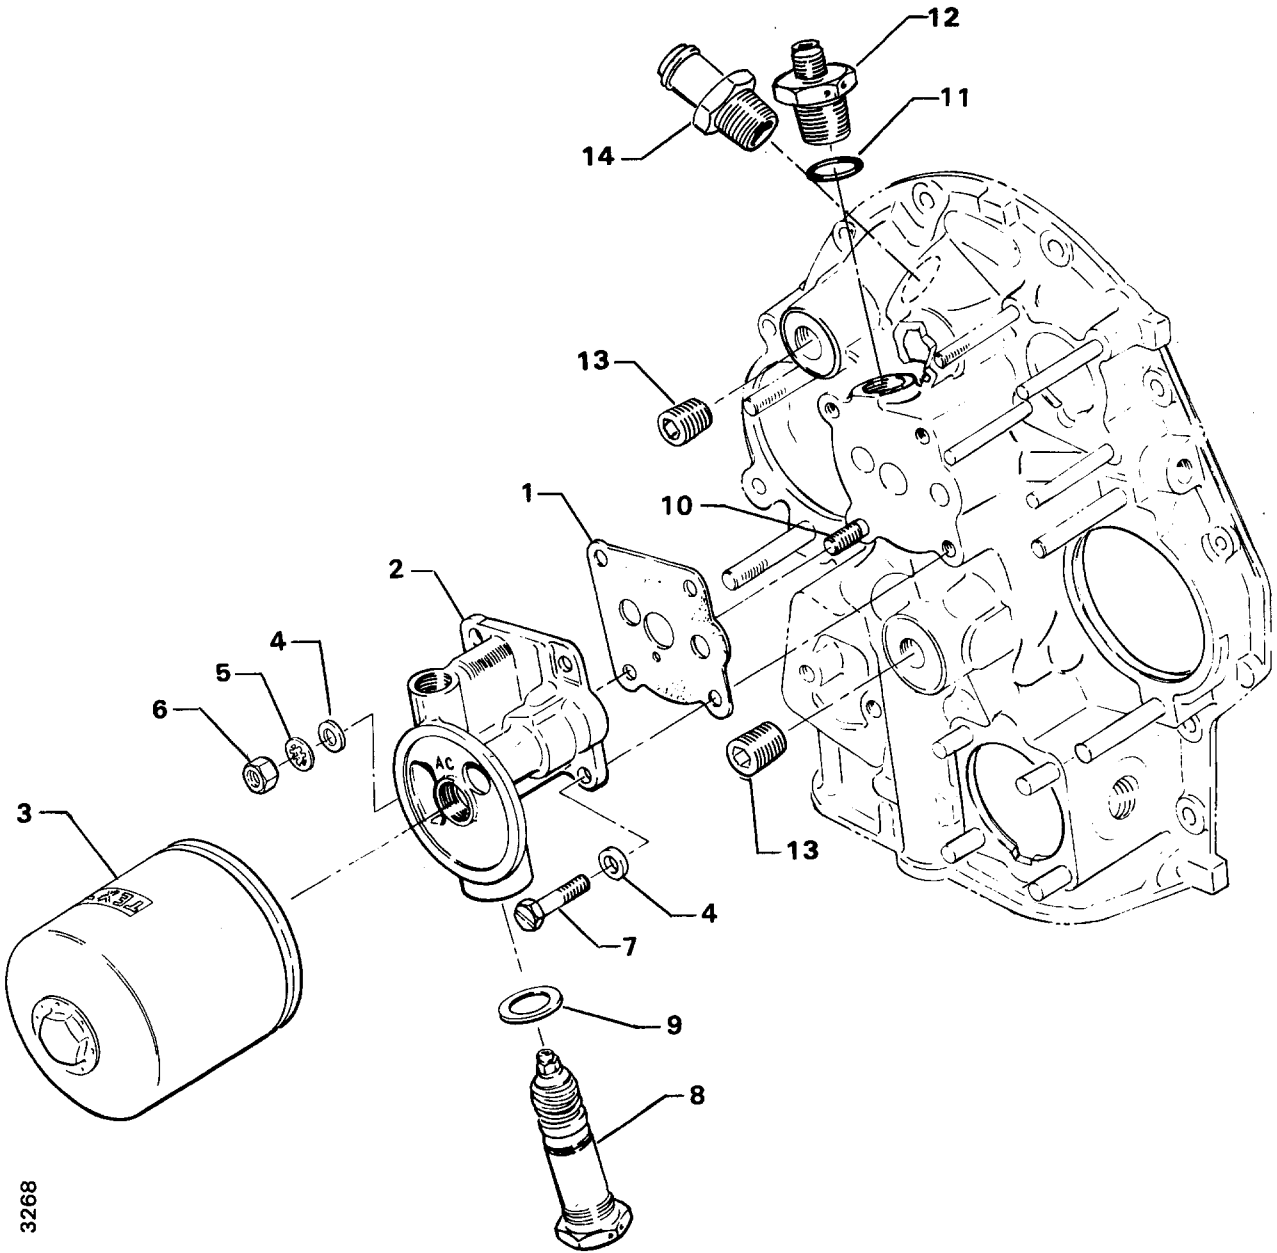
OIL FILTER AND OIL COOLER BYPASS VALVE
